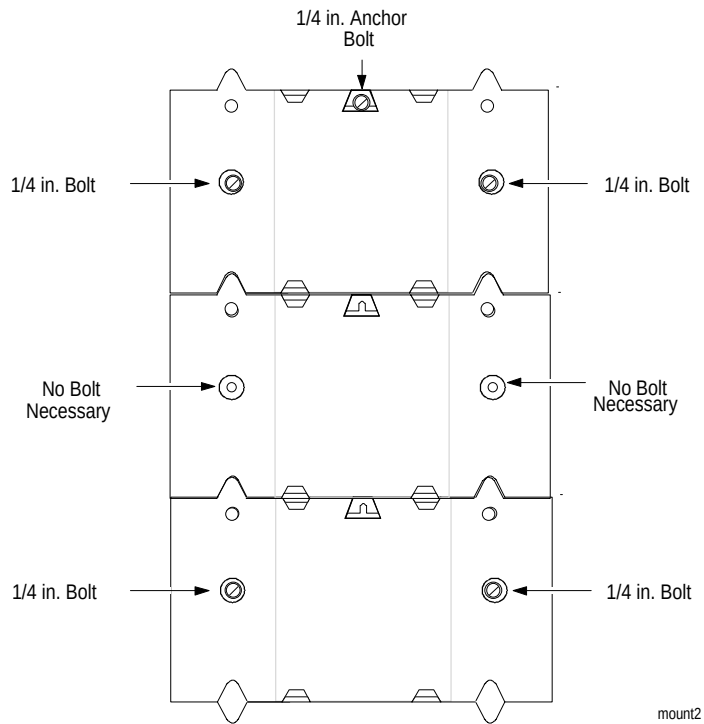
Bolt Locations When Mounting Multiple Enclosures
